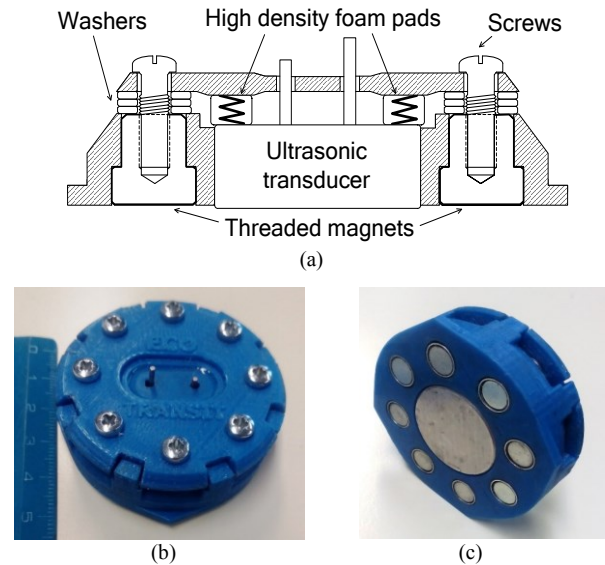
Fabricated magnetic case adapted to ultrasonic transducer 400EP250 (a) Scheme (b) Upper side photograph (c) Bottom side photograph.
